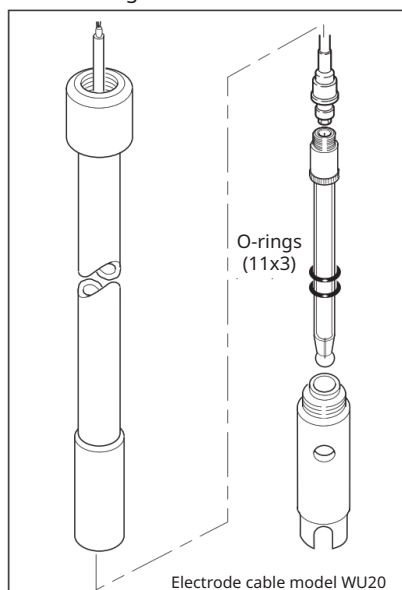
Mounting a cable and sensor in a 1-hole fitting
